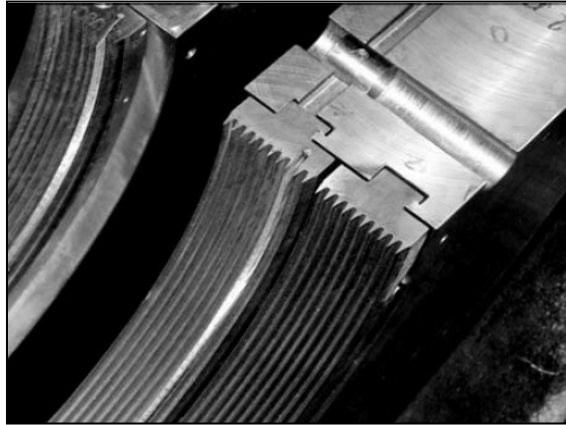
16 Brush seals installed in high-pressure steam packing's[18]
